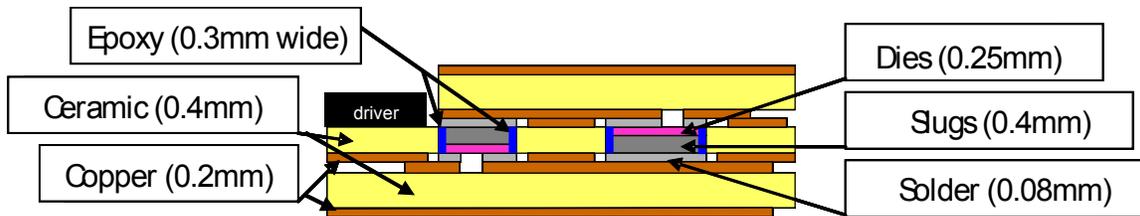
Cross-sectional view of Stacked Power module assembly
